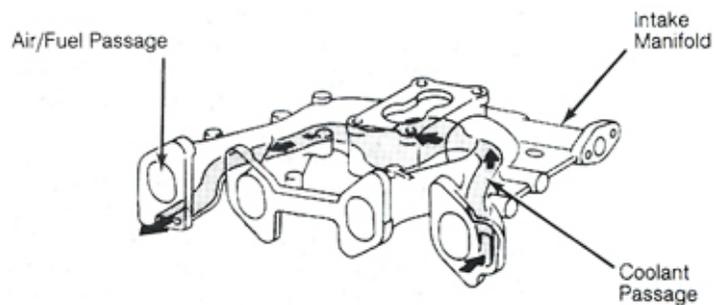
Coolant Heat Passages in Intake Manifold
